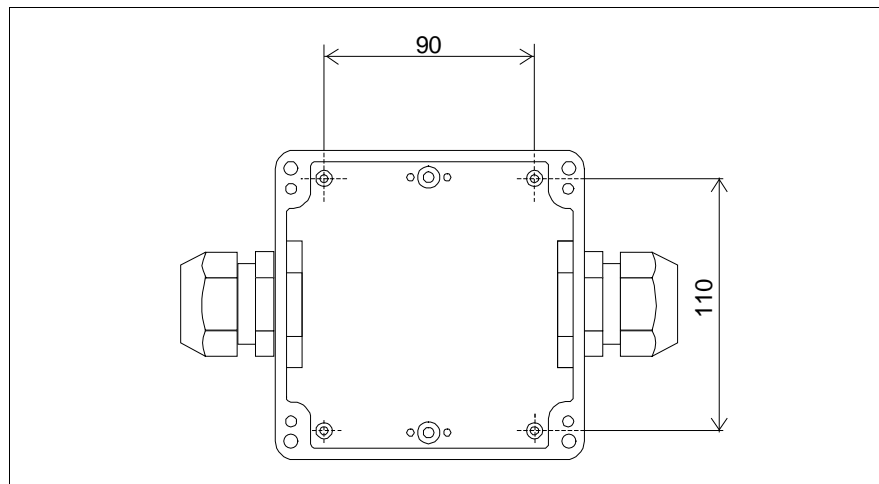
Distances of the drill holes in the bottom of the air filter housing
